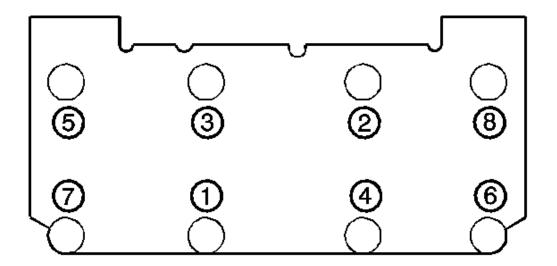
View Of Cylinder Head Bolt Tightening Sequence Courtesy of GENERAL MOTORS CORP.
